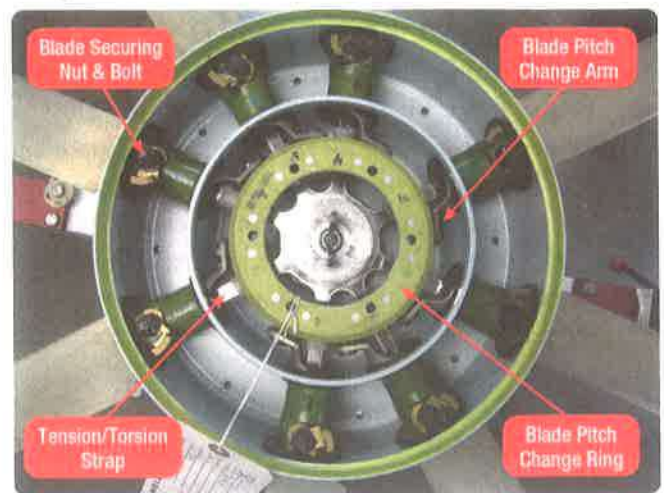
The inner workings of a Fenestron type tail rotor.
